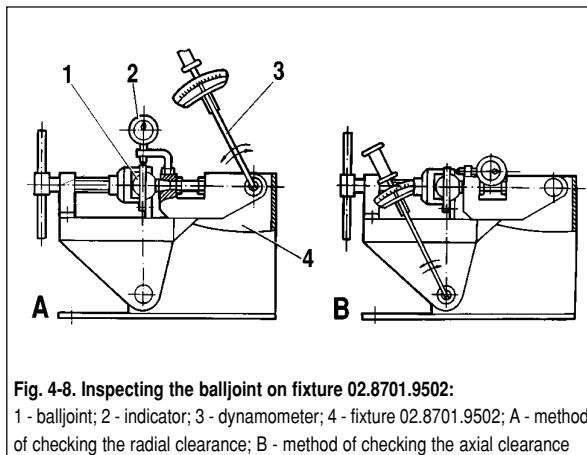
Inspecting the balljoint on fixture 02.8701.9502:
